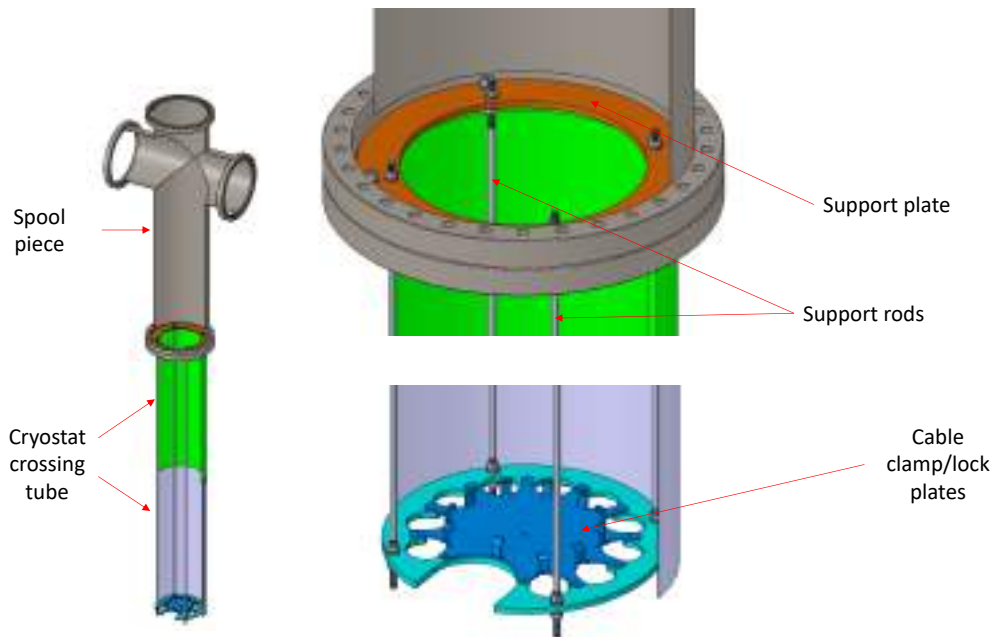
BDE cryostat feedthrough. Warm Electronics Interface Crates mount on the two horizontal flanges of the spool piece. The top flange is for photodetector cables and fibers. A fixture at the bottom of the crossing tube provides strain relief for the cable bundles.
